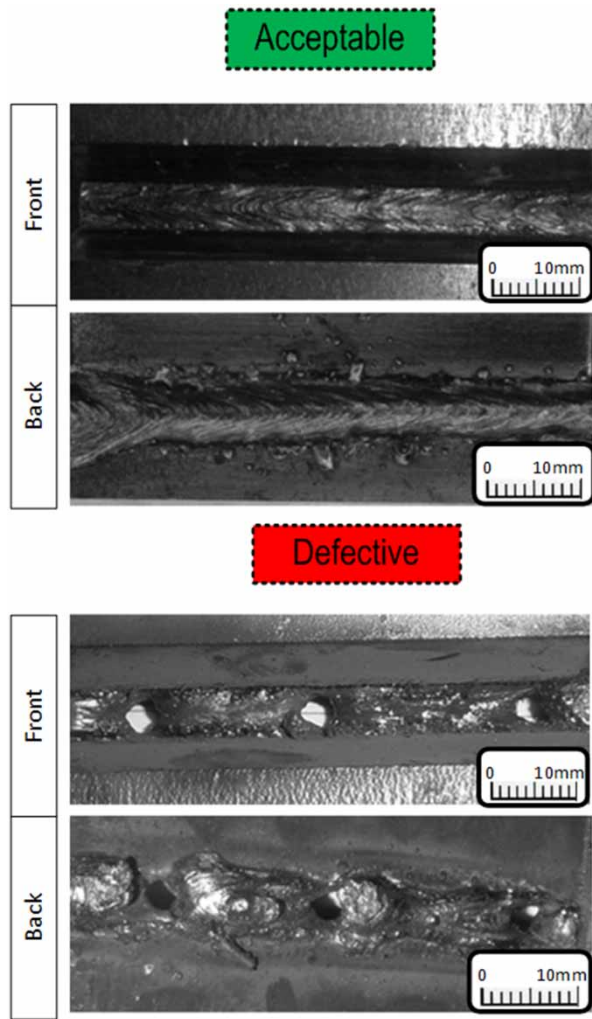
Acceptable and defective welds highlighting the defective welding 'window'/burn through on the WIC test at low heat input and high travel speed.
